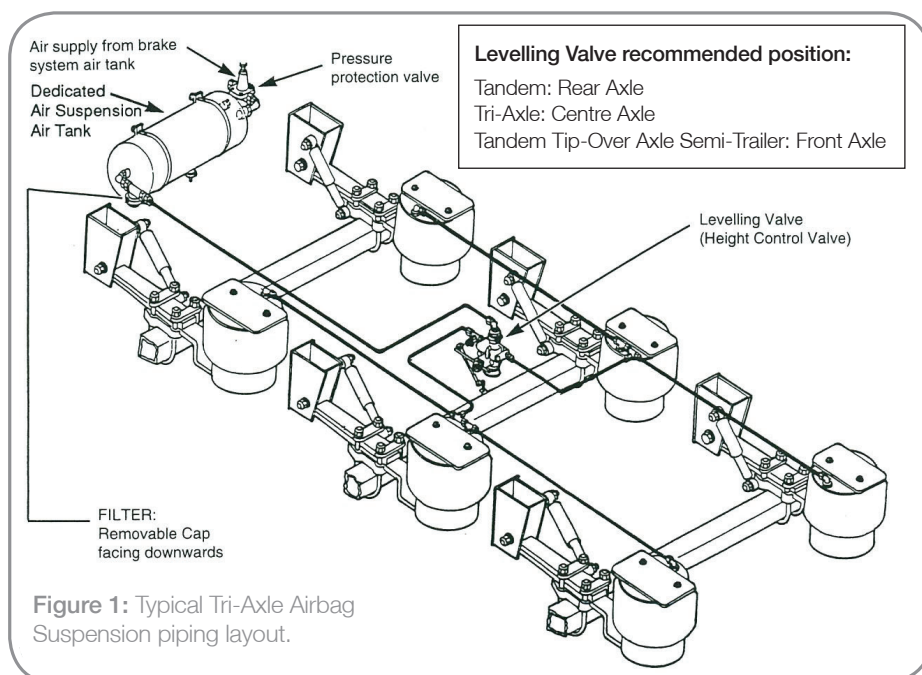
shows a typical airbag suspension piping layout for a single height control valve tri-axle system.
